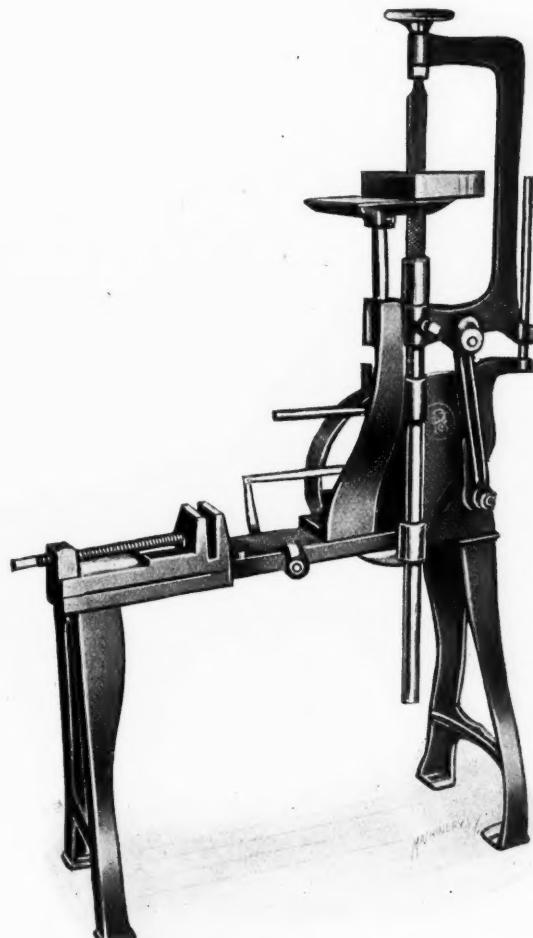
Robertson's "Royal" Power Hack-saw arranged to be used as a Filing Machine.
